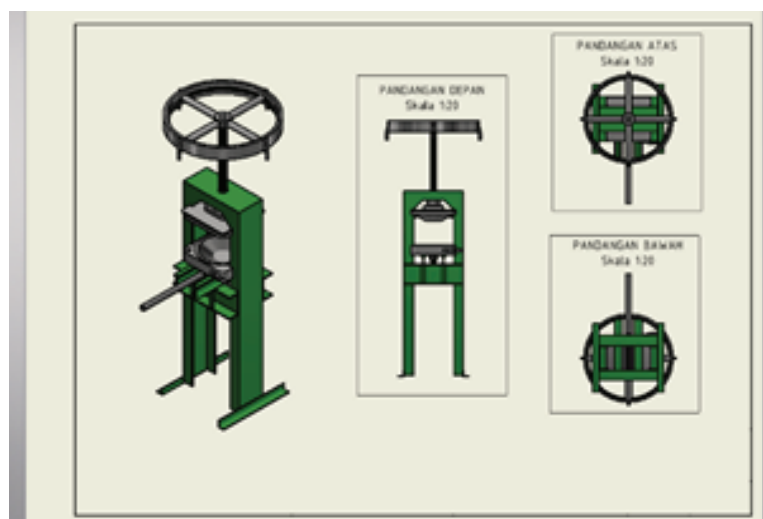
3D Prototype Picture of A Mortar Molding Machine with A Diameter of 30 cm.
